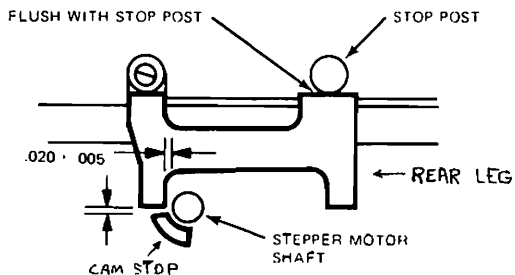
CARRIAGE LIMITER ADJUSTMENT
